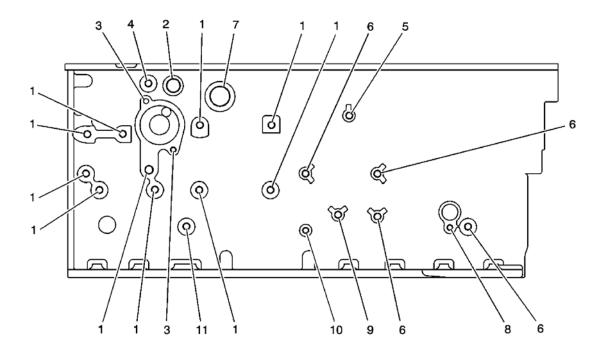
Engine Block Thread Repair - Left Side View Courtesy of GENERAL MOTORS CORP.
